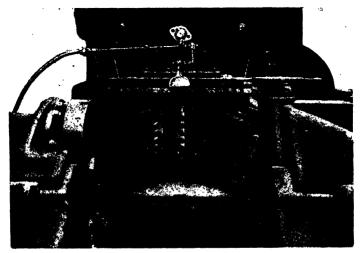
"Sunderland" Double Helical Machine Cutter Head
